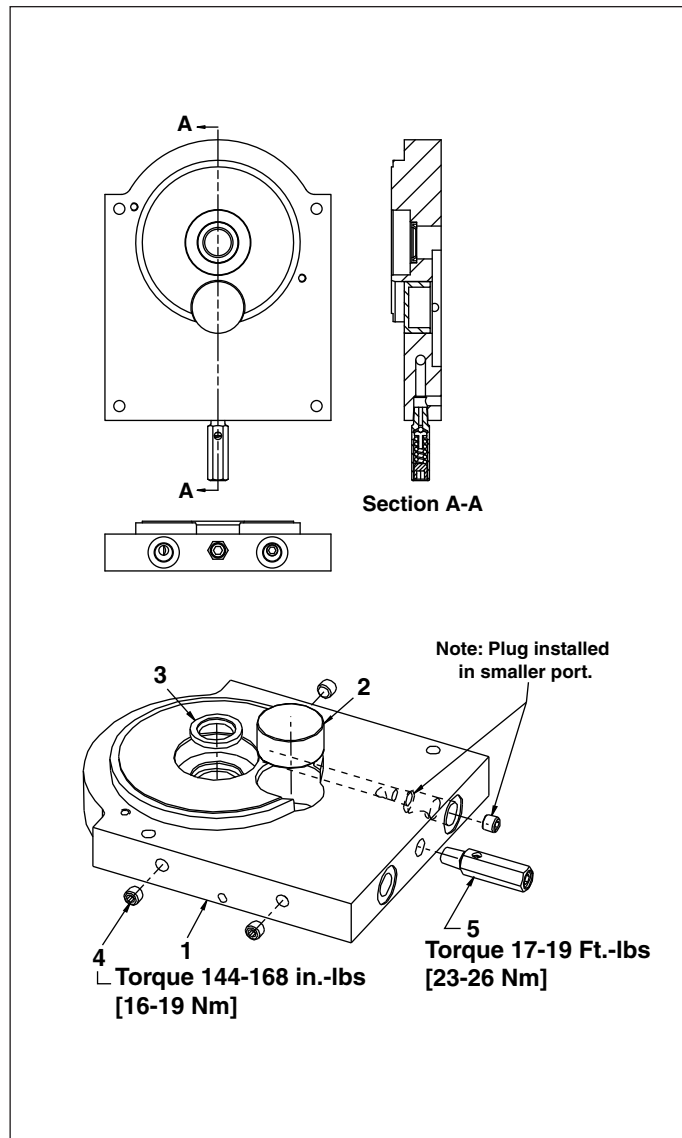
A, Top Plate Assembly for Gear Reduction Motor (ZU Series - All Date Codes)
